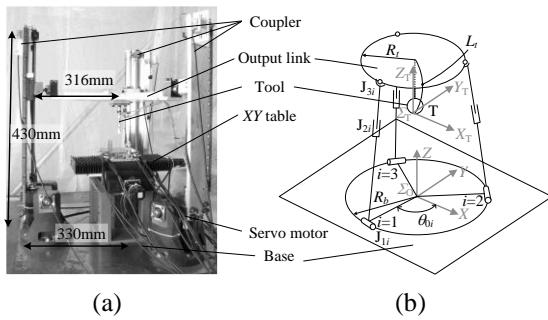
Machine tool of a hybrid type parallel mechanism, (a) Overall view of the machine tool, (b) Kinematic model of a 3 degree-of-freedom parallel mechanism
